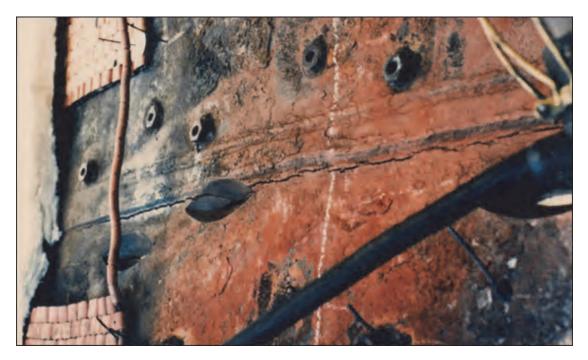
Typical Cracking Observed at Skirt-to-Bottom Head Weld
